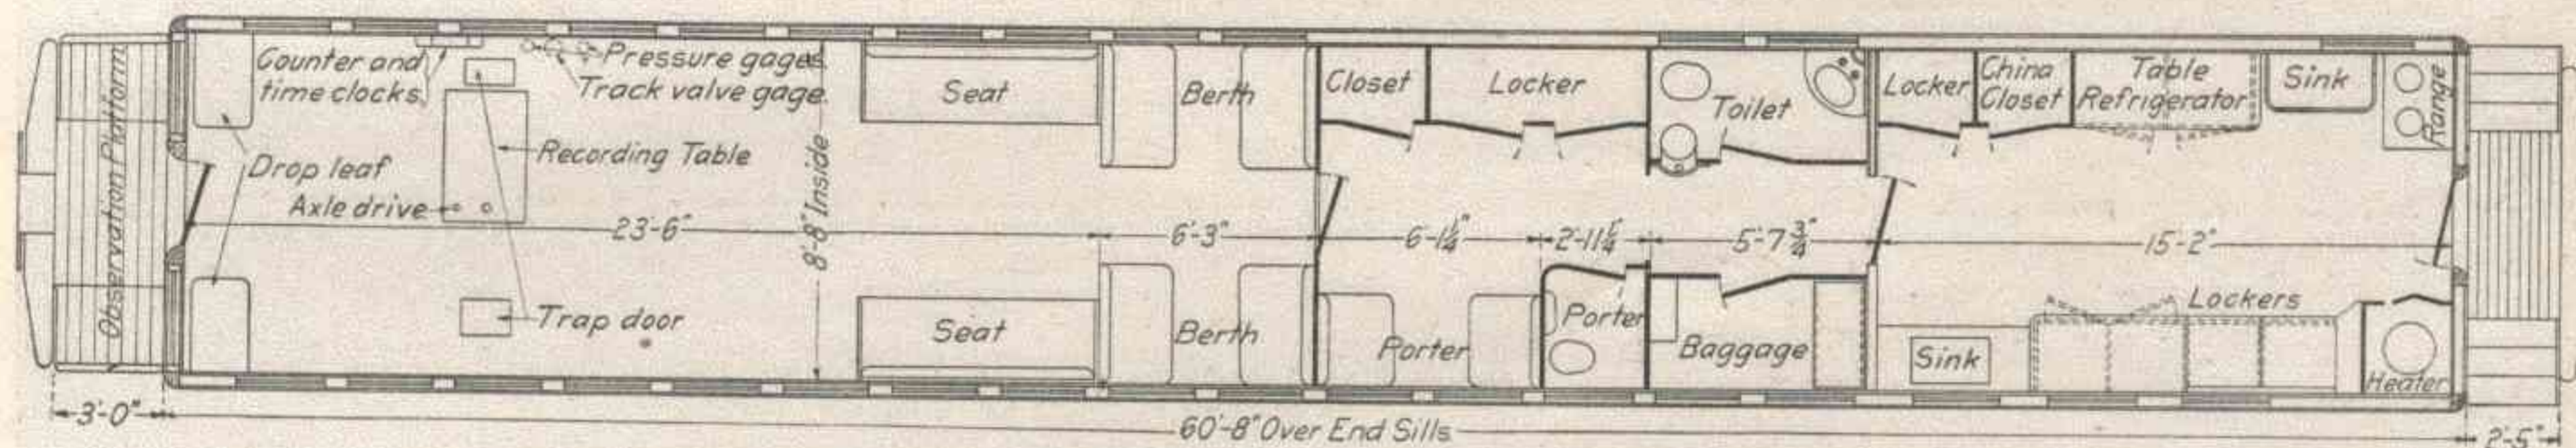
Erie Track Inspection Car, Floor Plan.
